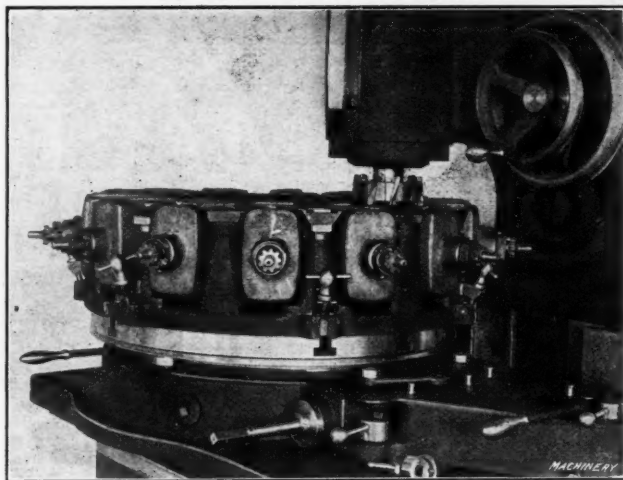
Type of Fixture used for milling Part No. I in Fig. 2
